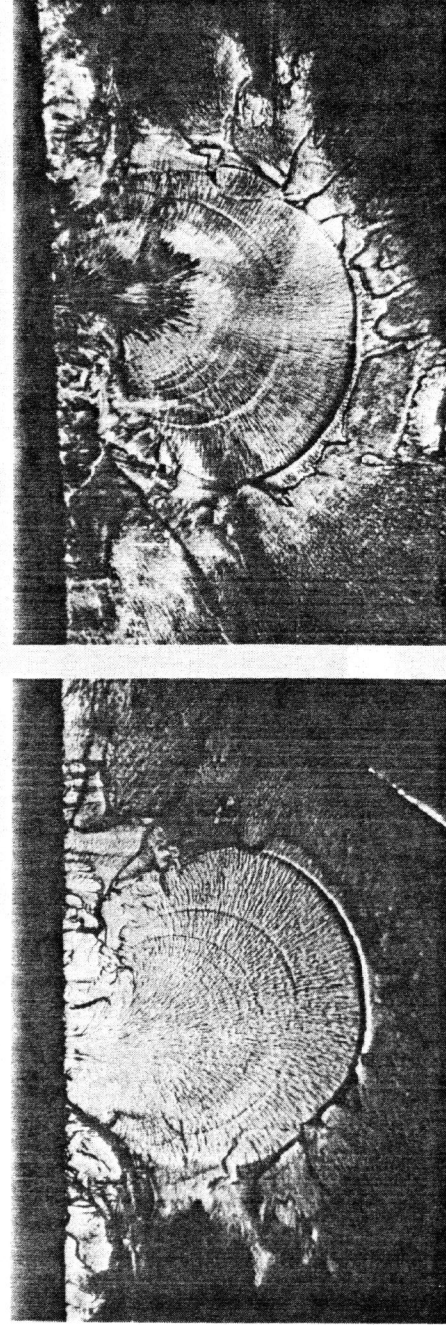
Pulse marks produced on a fracture nucleus face of a plate specimen
